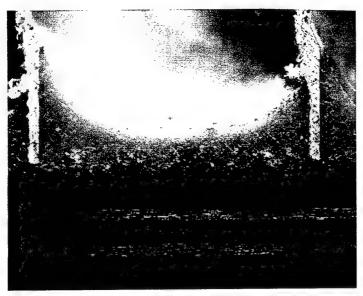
Cross sectional view of the adhesive fillet bond on a newly manufactured panel showing the thin green layer of discoloured adhesive.
